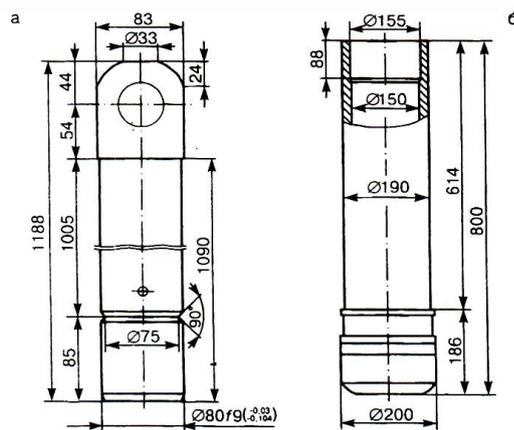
Rod (a) and plunger (b) of cargo-lifting equipment
